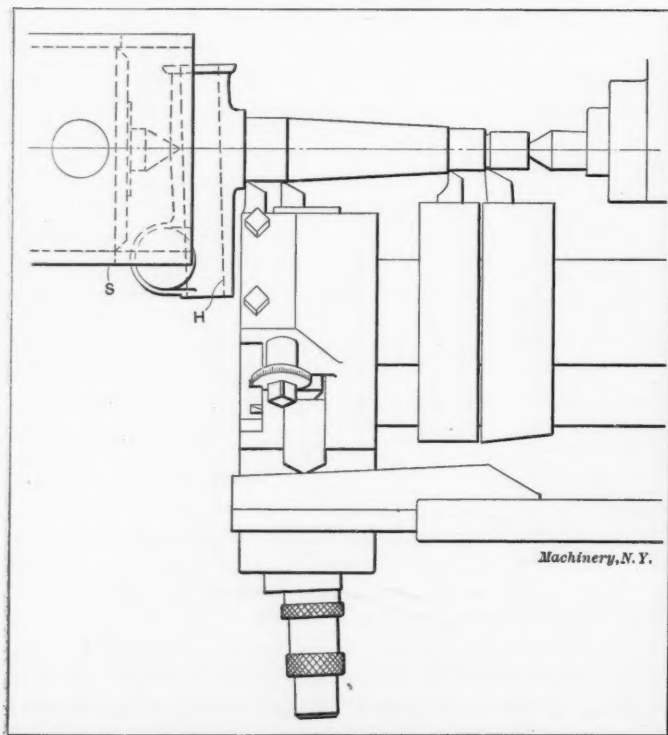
Plan View showing Method of Driving Steering Knuckle, and Tooling
